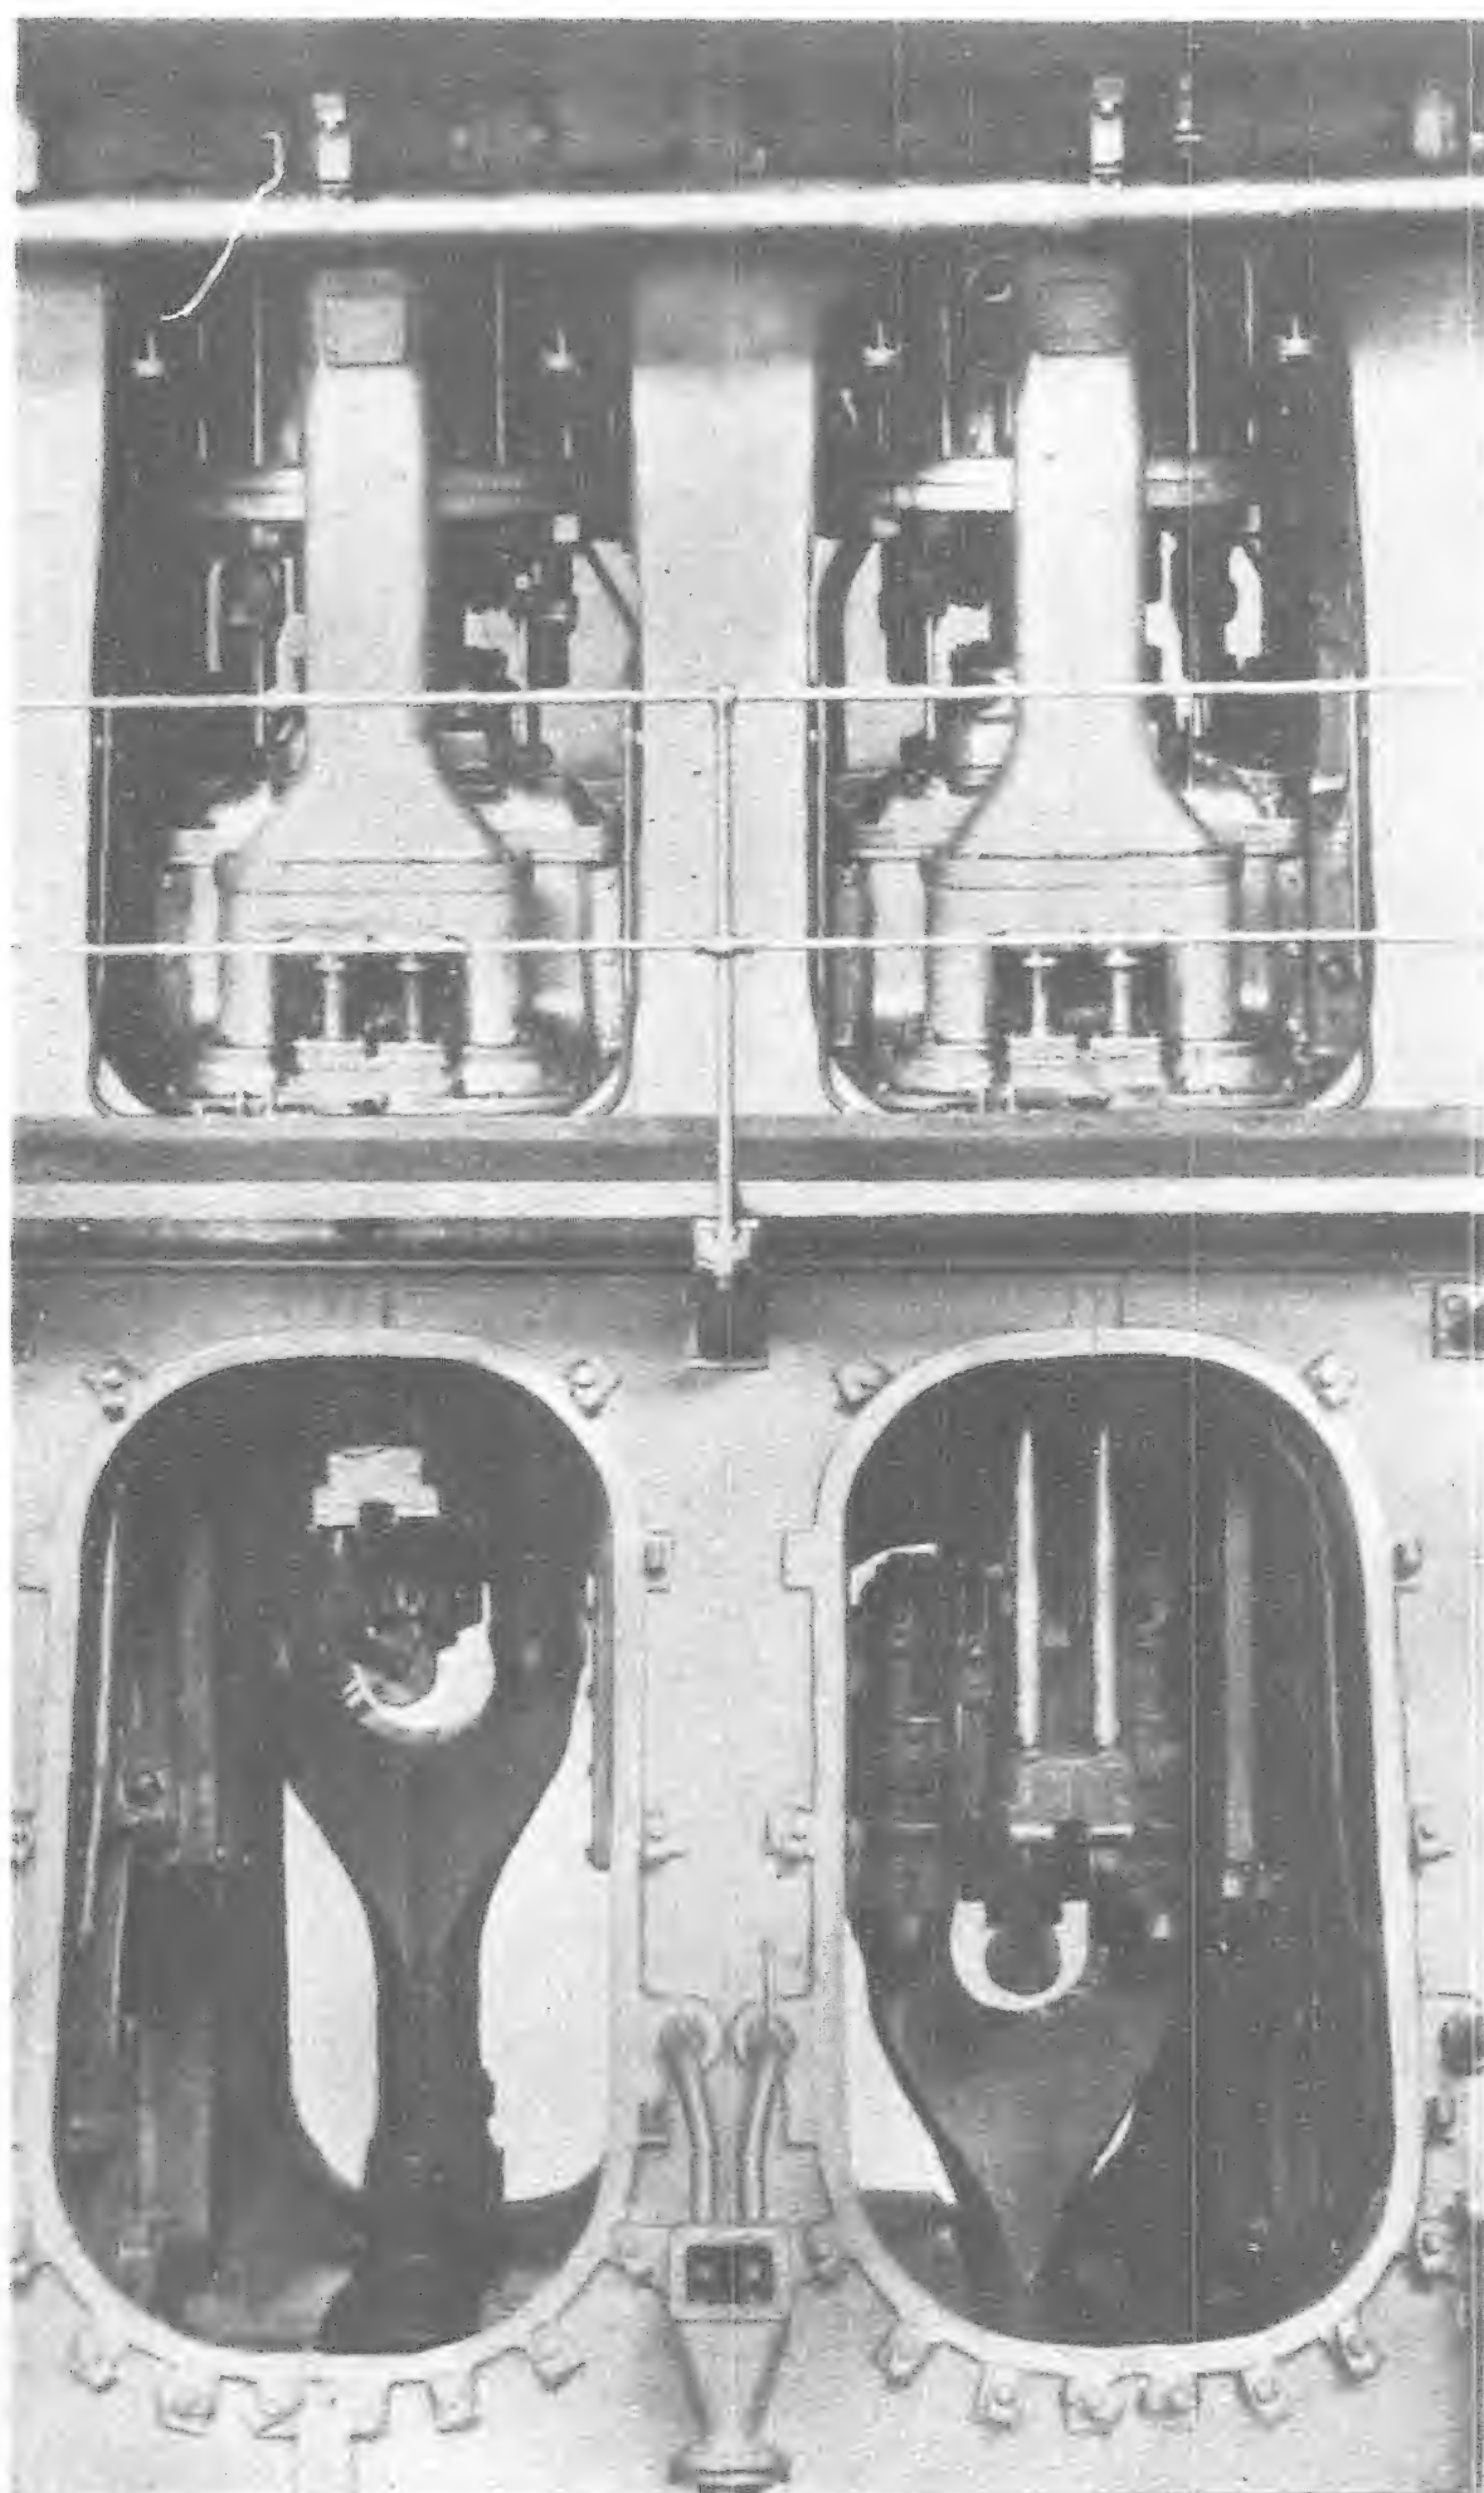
Bottom cylinder covers, reciprocating gear and crank case (with doors removed)
